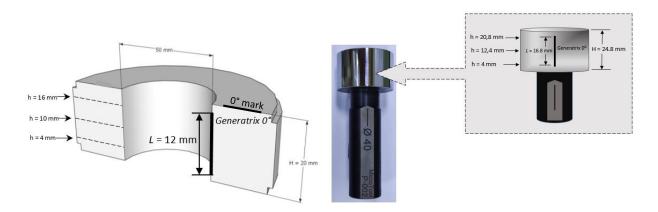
Straightness measurement location on the plugs: 50 mm ring (left) and 40 mm plug (right)
